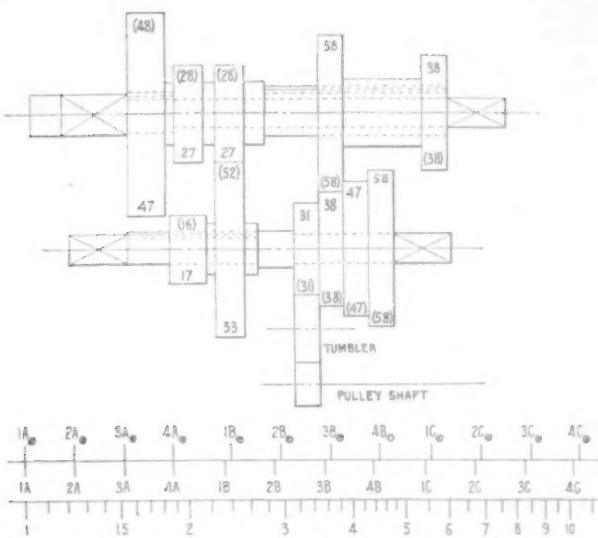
Diagram of Driving Gear of a Well-Known Make of Milling Machine
